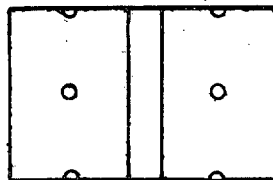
Location of tension test and microscopic test specimens for gear rim forgings.
